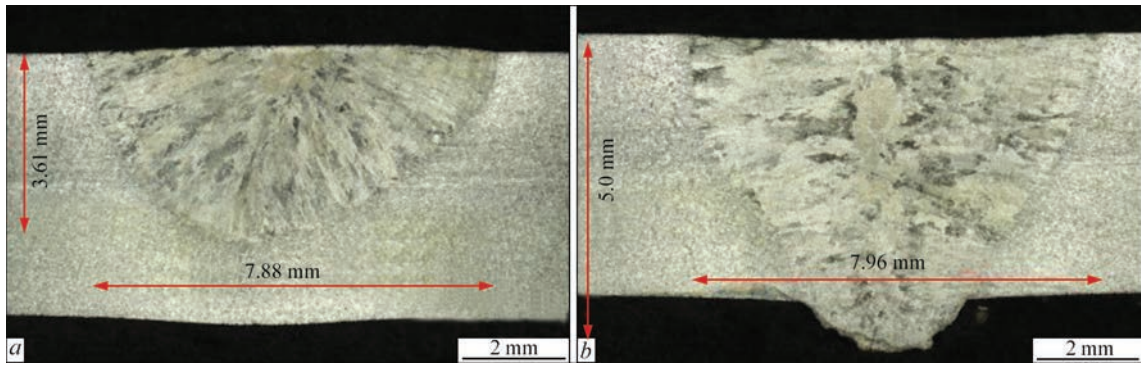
Shapes of welds in TIG welding. *a* — with direct current; *b* — with HFP modulation of the welding current
